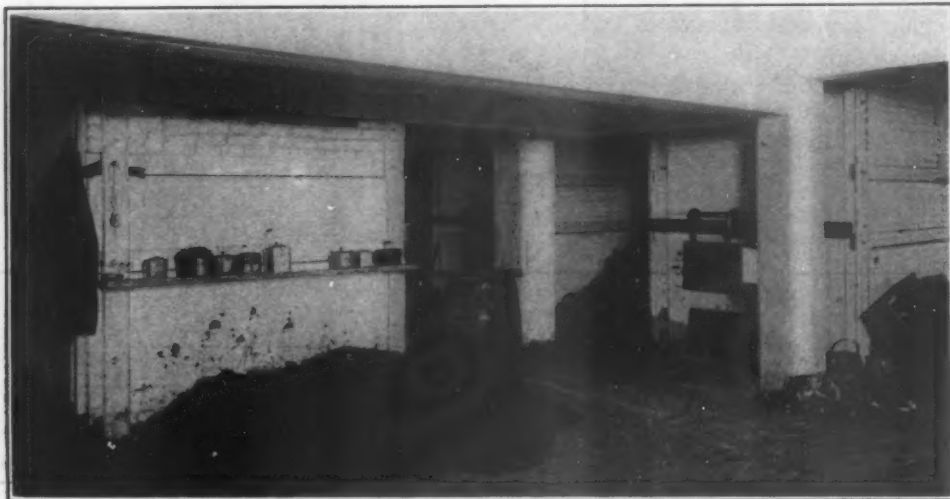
The Fire Boxes on the First Floor of the Ferro Machine & Foundry Company's Core Oven Department.
